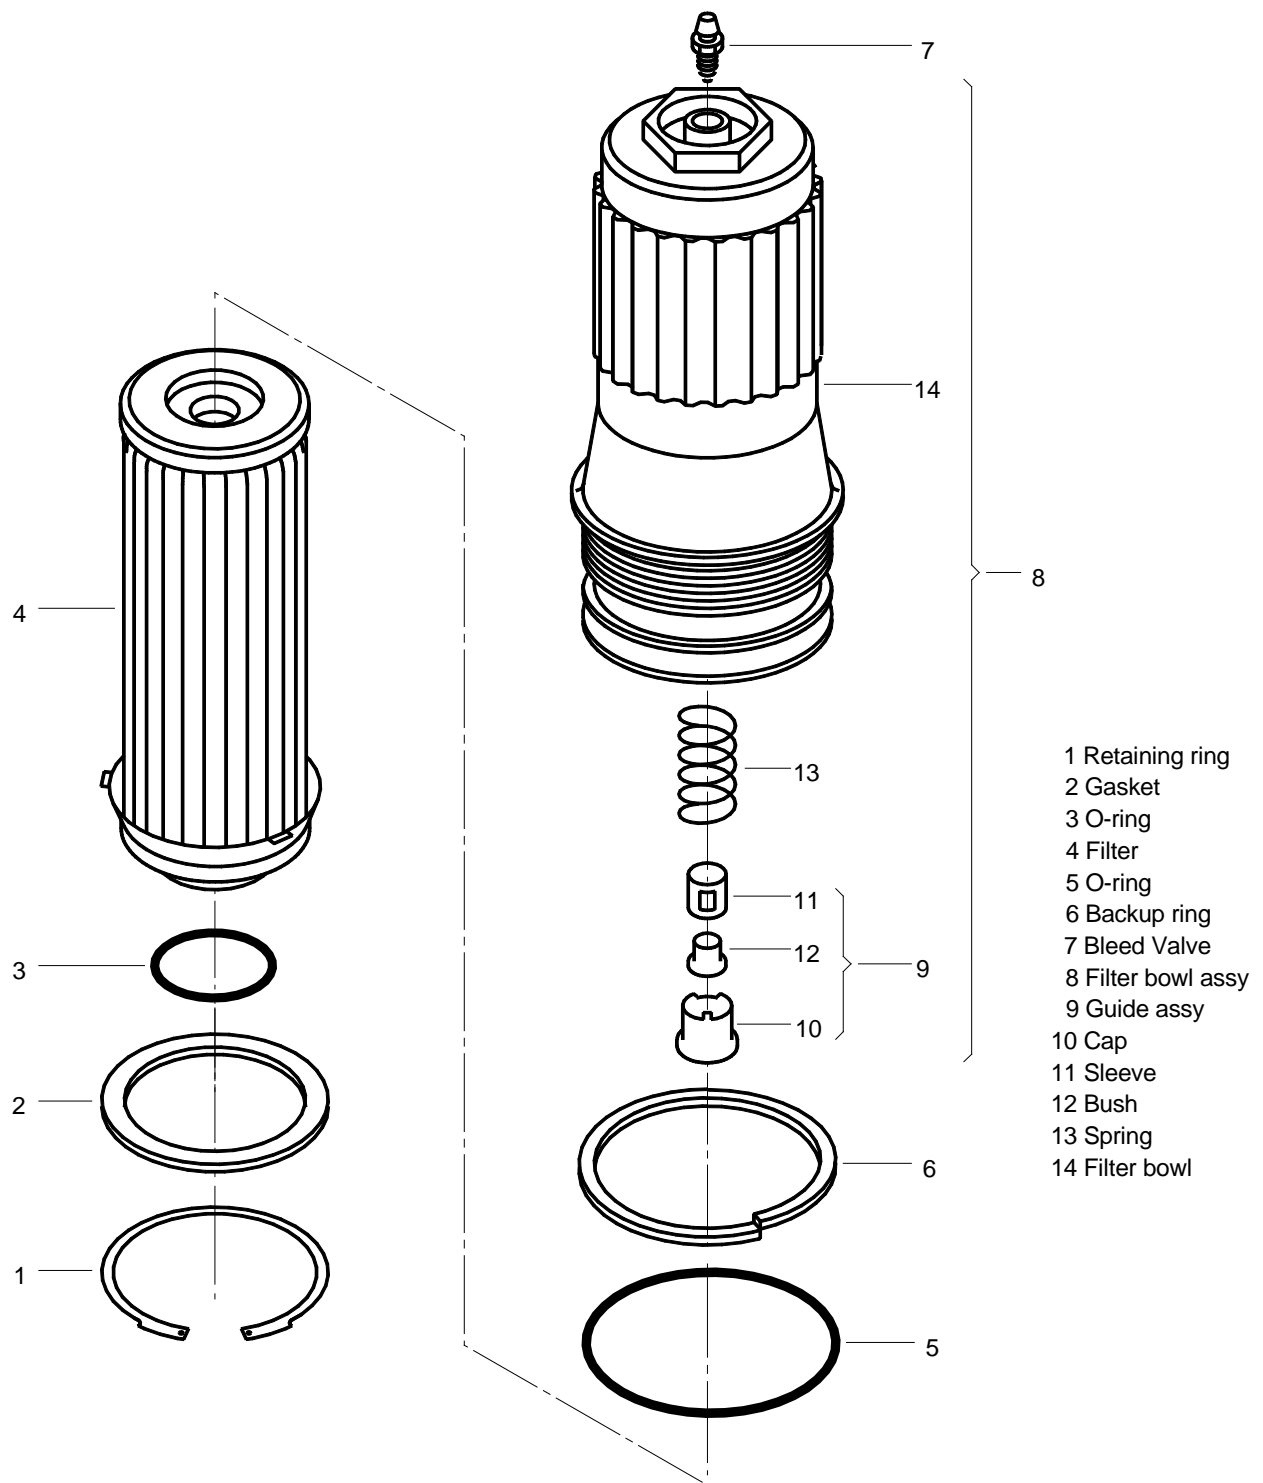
Disassembly code 00 (Assignment of subjects of disassembly)
